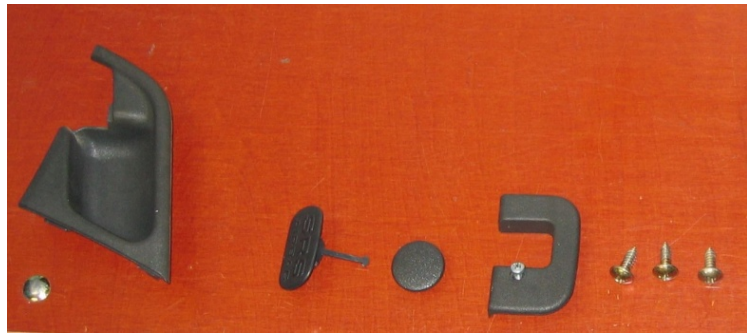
Step 11: the door cover can be removed. The parts must be stored for reassembly later on. (photography by Clemens Günther)
